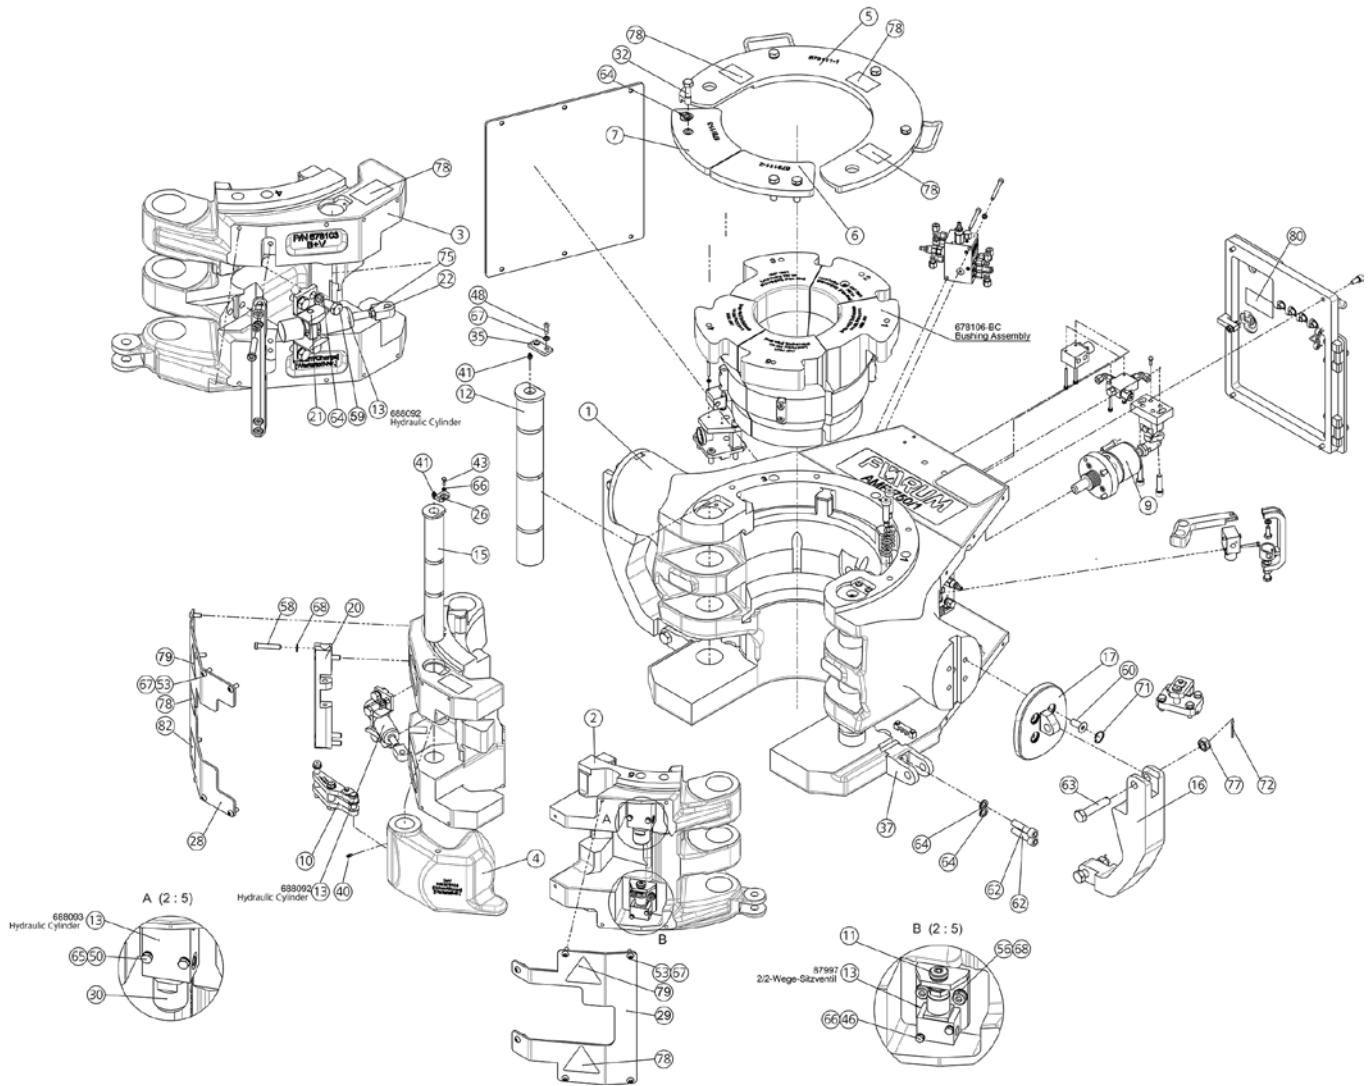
678100-Y AMP®-750/1 and 618100-Y AMP®-1000/1 Drawing I
